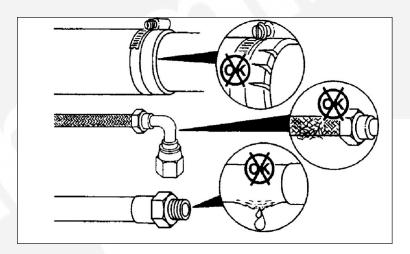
HOSES AND FUEL LINE INSPECTION
